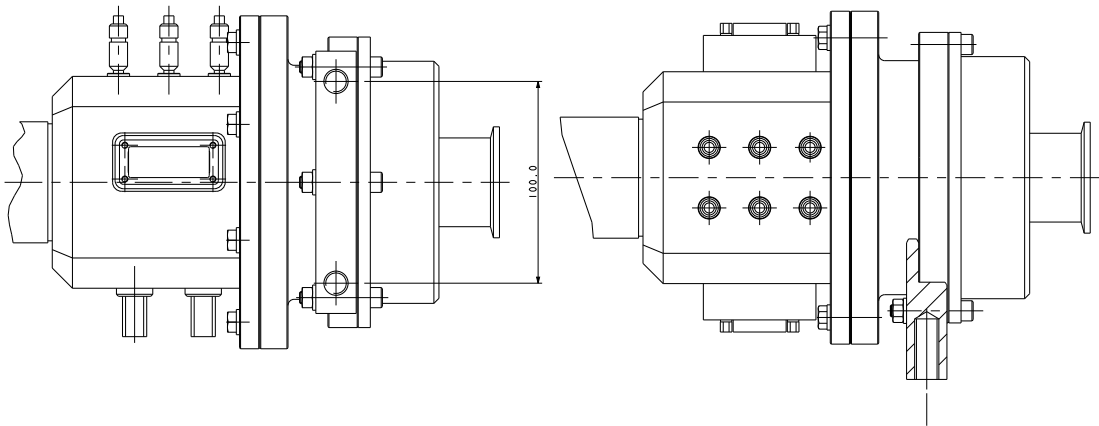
CAD drawing the vacuum feedthroughs used on TPEN from two different angles.
